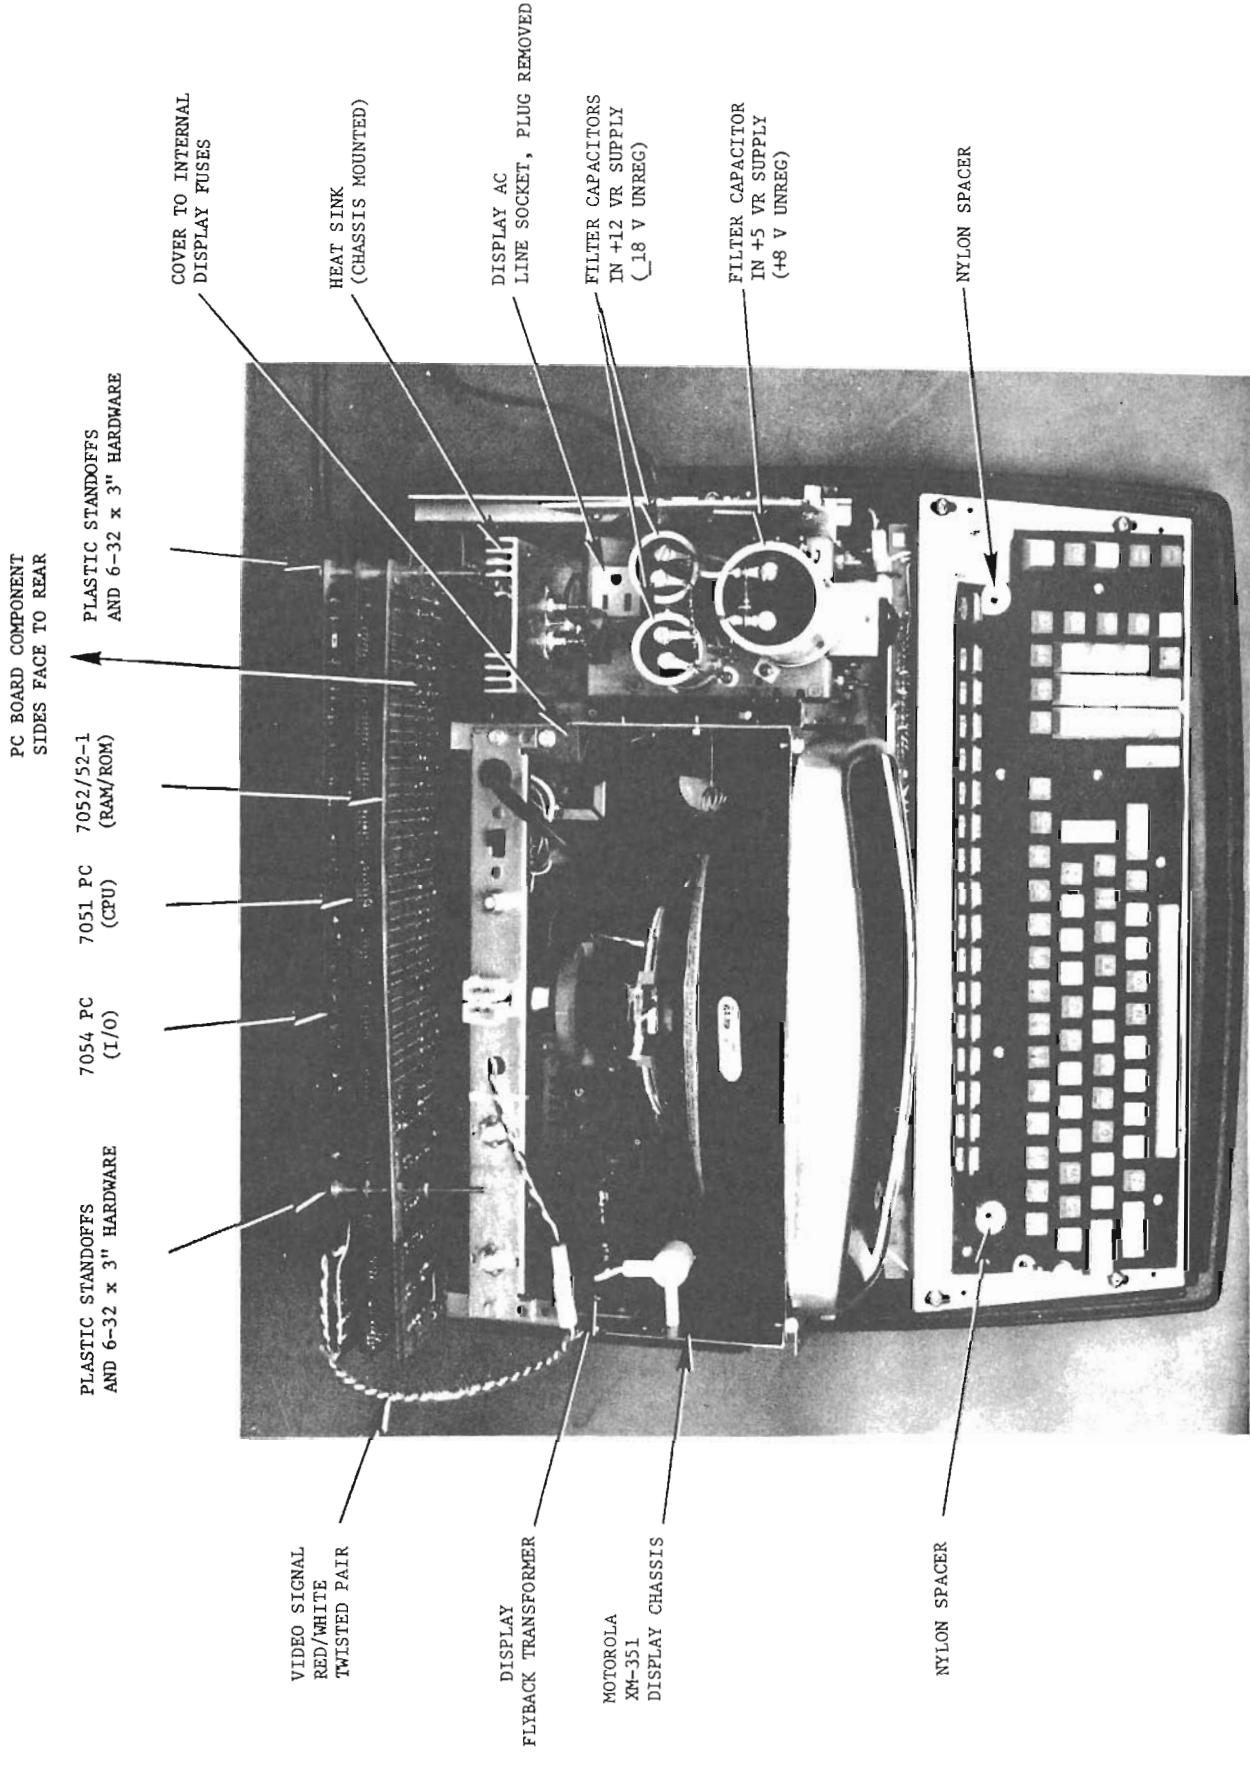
2200F; TOP VIEW/COVER REMOVED
